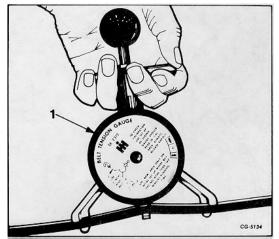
Checking Belt Tension with Belt Tension Gauge SE-2312
